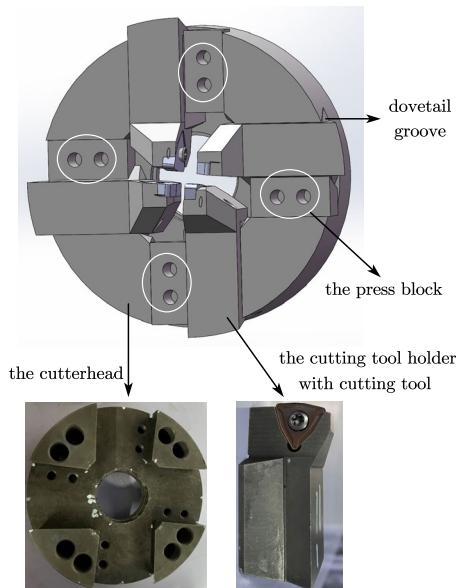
Structural diagram of the cutterhead cutting system in the finishing process equipment
